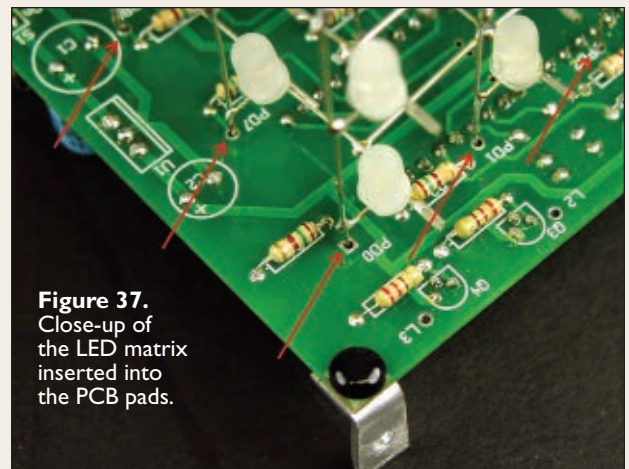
Close-up of the LED matrix inserted into the PCB pads.
